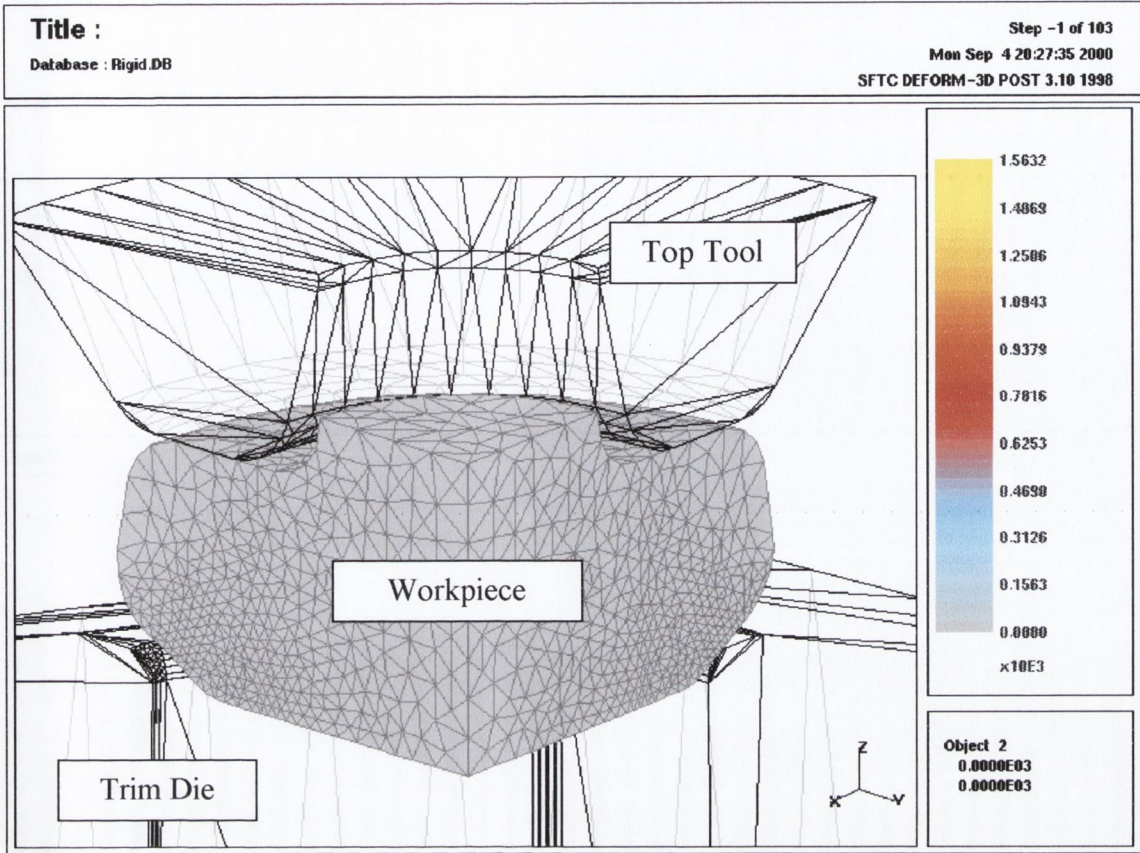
One-Quarter Model Showing Workpiece and Rigid Trim Die and Top Tool
